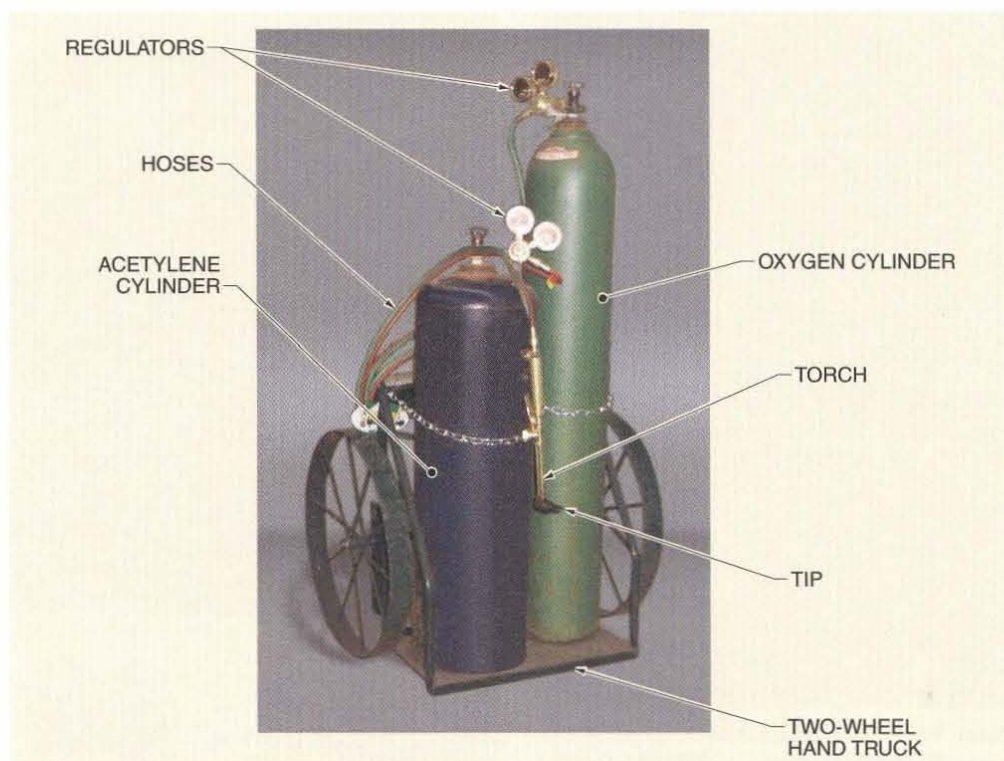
An oxyacetylene welding torch provides complete control of the flame during welding.
